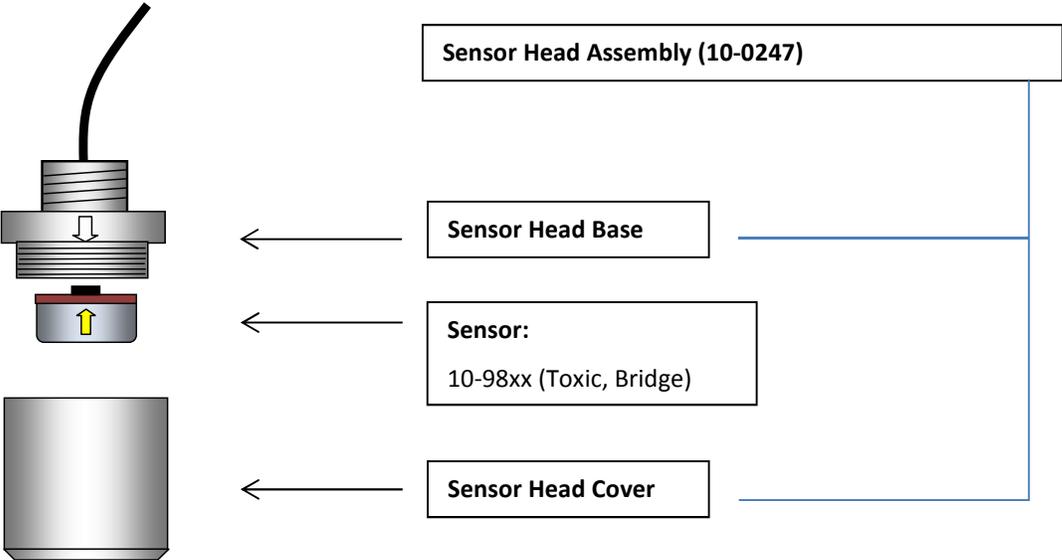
GDS-58NXP Standard Sensor Head Exploded View
